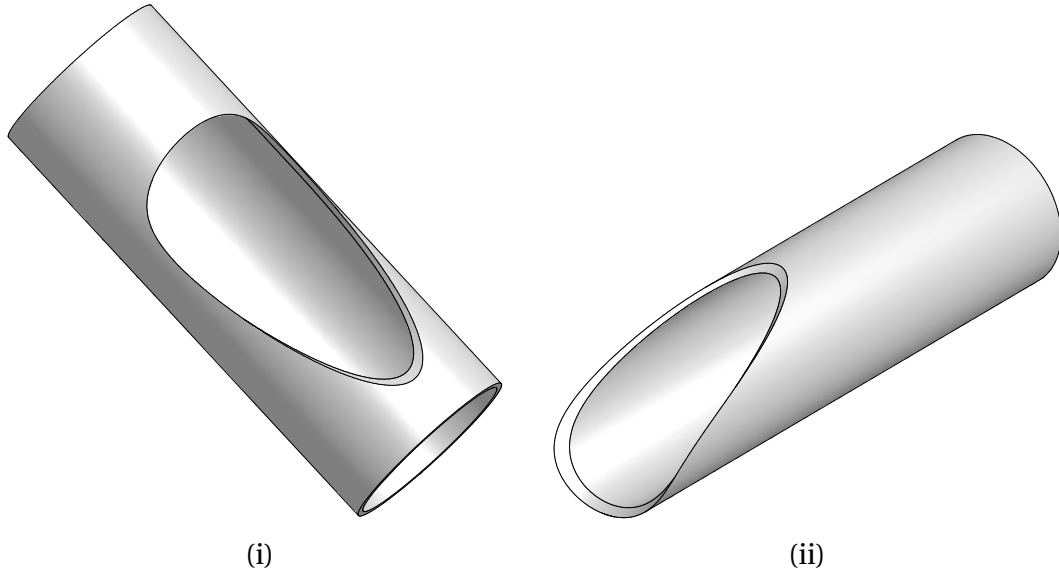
CAD models of (i) the holes that had to be machined into the large spectrometer guide and (ii) the corresponding piece needed to adapt the vertical guides to the large spectrometer guide.
